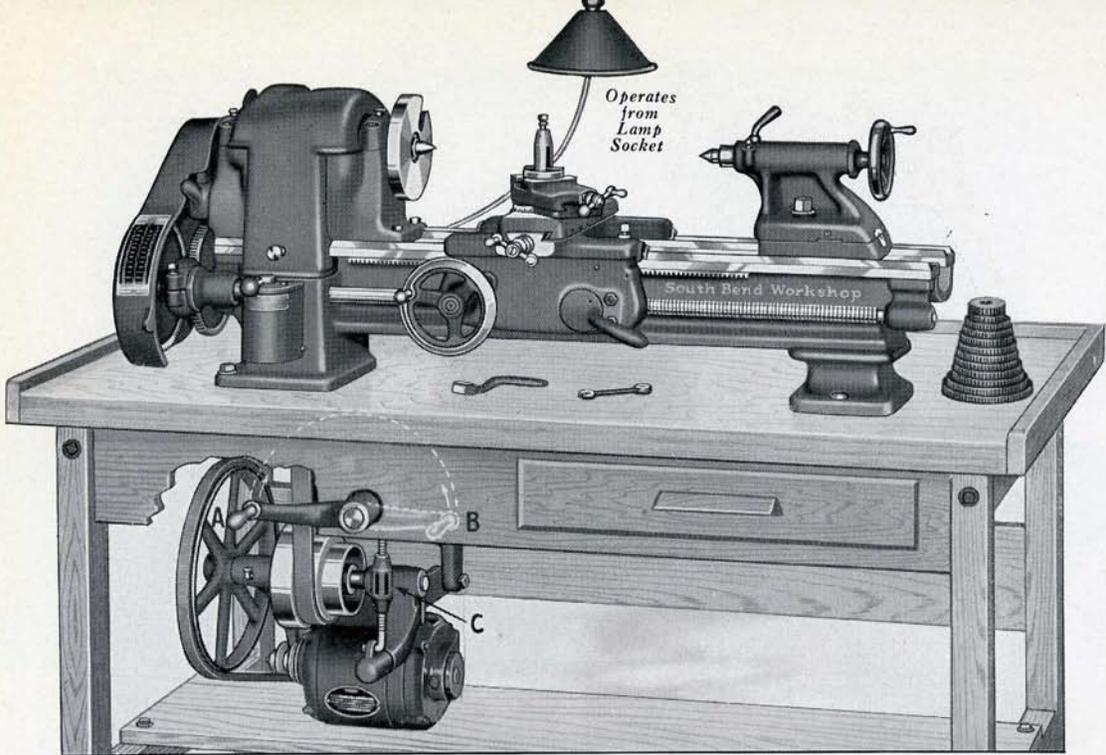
Cat. No. 115-YB, 9" x 3" "Workshop" Underneath Belt Motor Drive Bench Lathe...\$155.00
